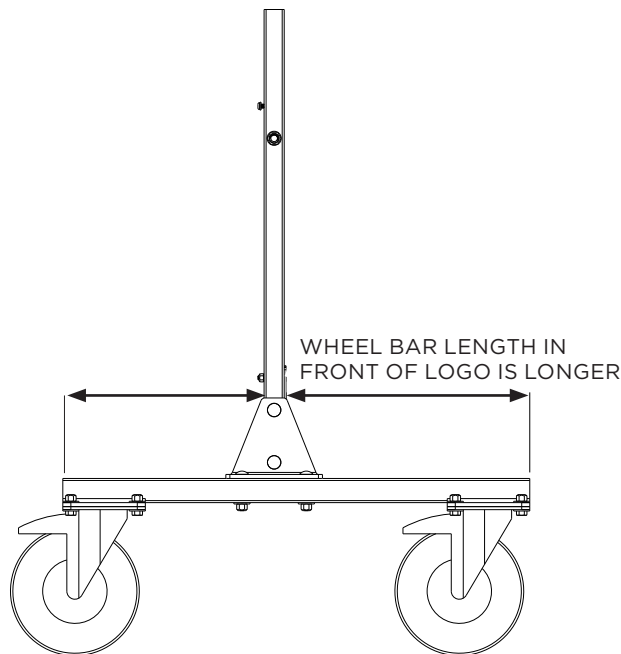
LONGER SECTION OF WHEEL BAR EXTENDS IN FRONT OF CROSS BAR
